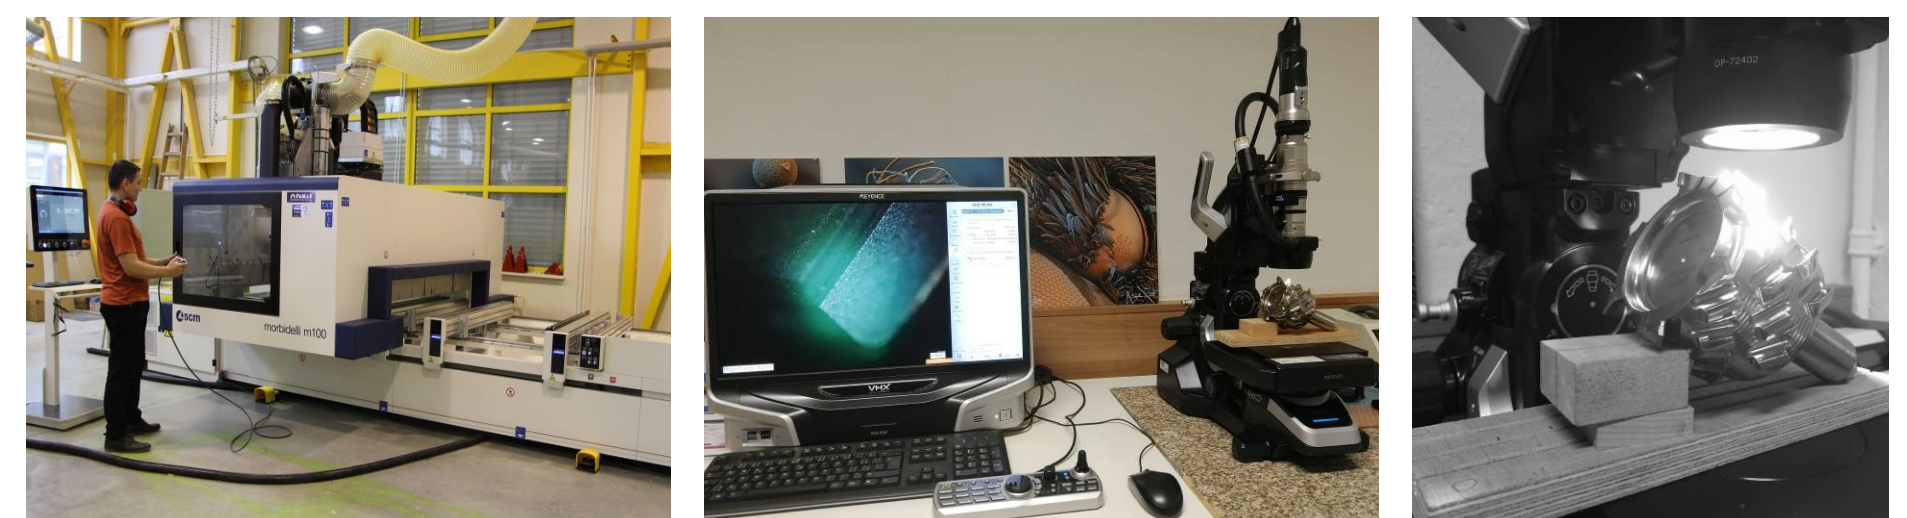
Measurement of cutting forces on CNC machine; Evaluation the machined surface quality; Measurement of tool blunting
